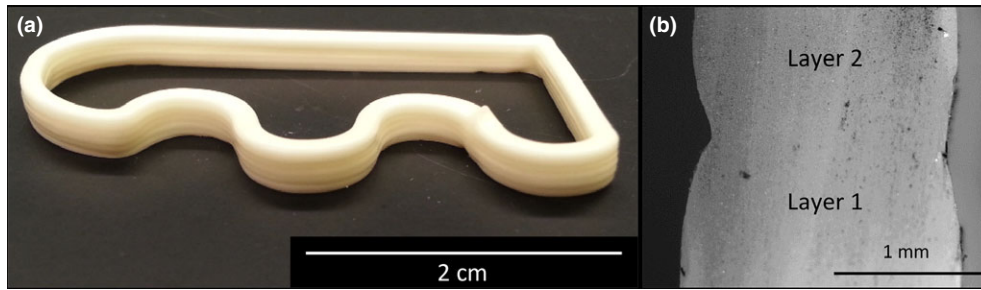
Test shape formed by room-temperature direct writing of a 55 vol.% alumina suspension (a) after binder removal and sintering. (b) Cross section of the sintered piece acquired via optical microscopy shows adhesion between subsequent deposited layers of alumina suspension.
